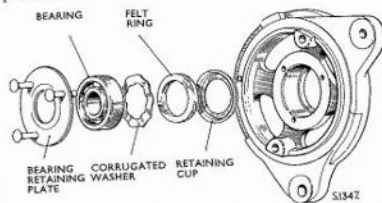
Details of the drive end bracket assembly (C45 PV-6 type dynamo)
